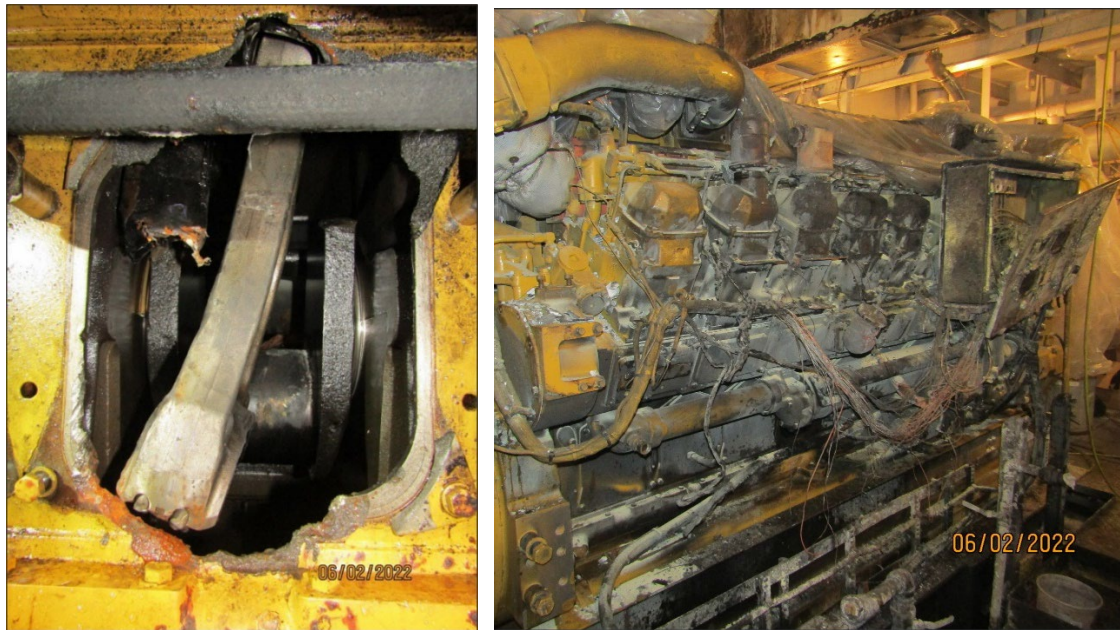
Damage to the crankcase and connecting rod of no. 3 diesel engine (*left*) and engine (*right*).
